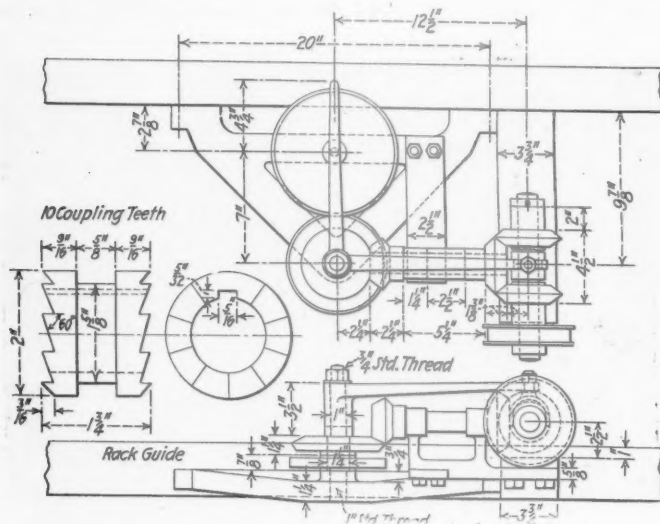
Reversing mechanism of attachment for grinding the radii of valve links
